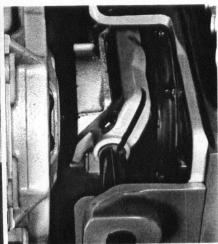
Don't let the transmission drop or hang unsupported in the driven discs. Install transmission mounting bolts, torque to proper specs and attach linkage. You are now ready to adjust the clutch.
